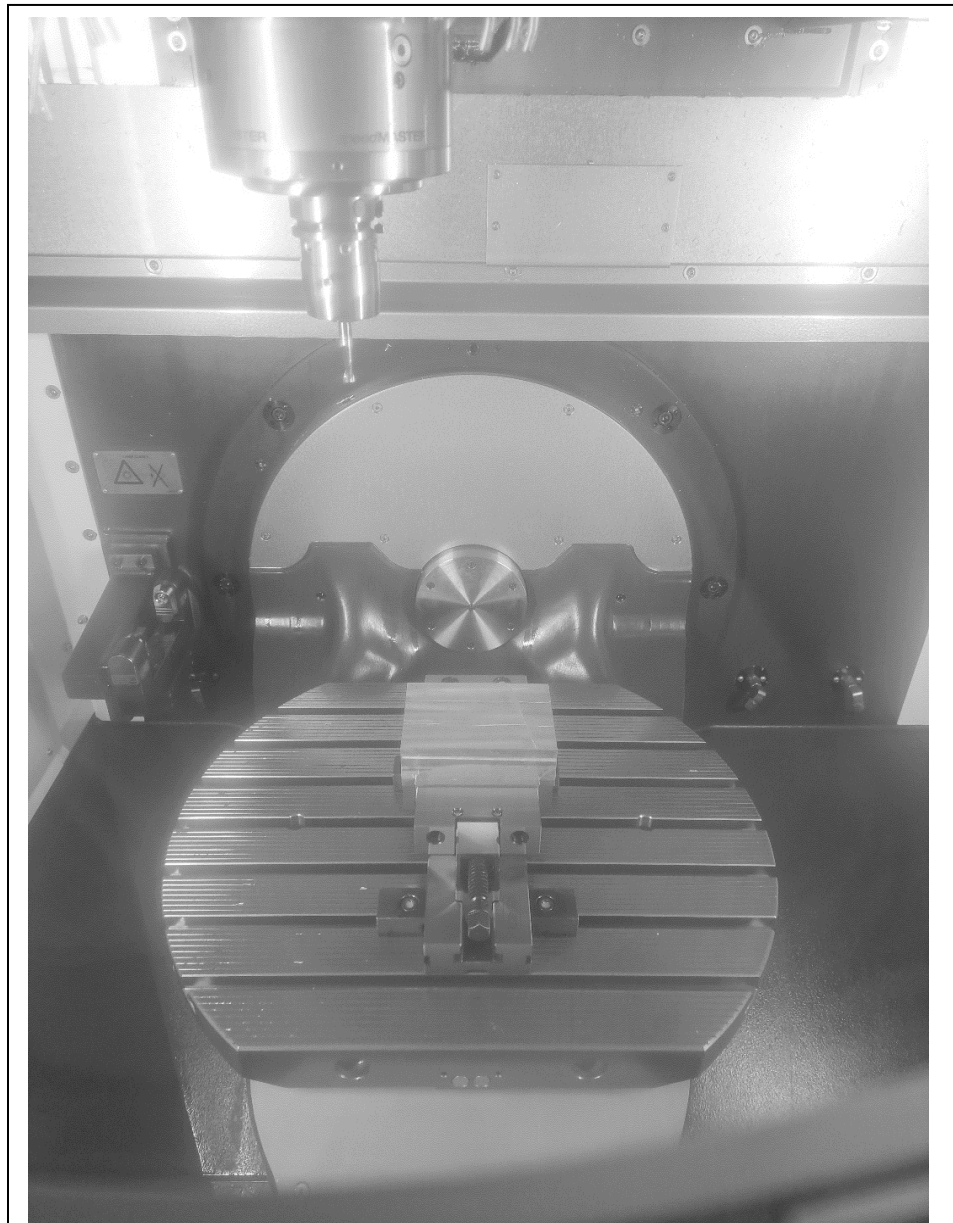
Stock material setup in a vise on DMU 50 Five Axis CNC Machining center.
